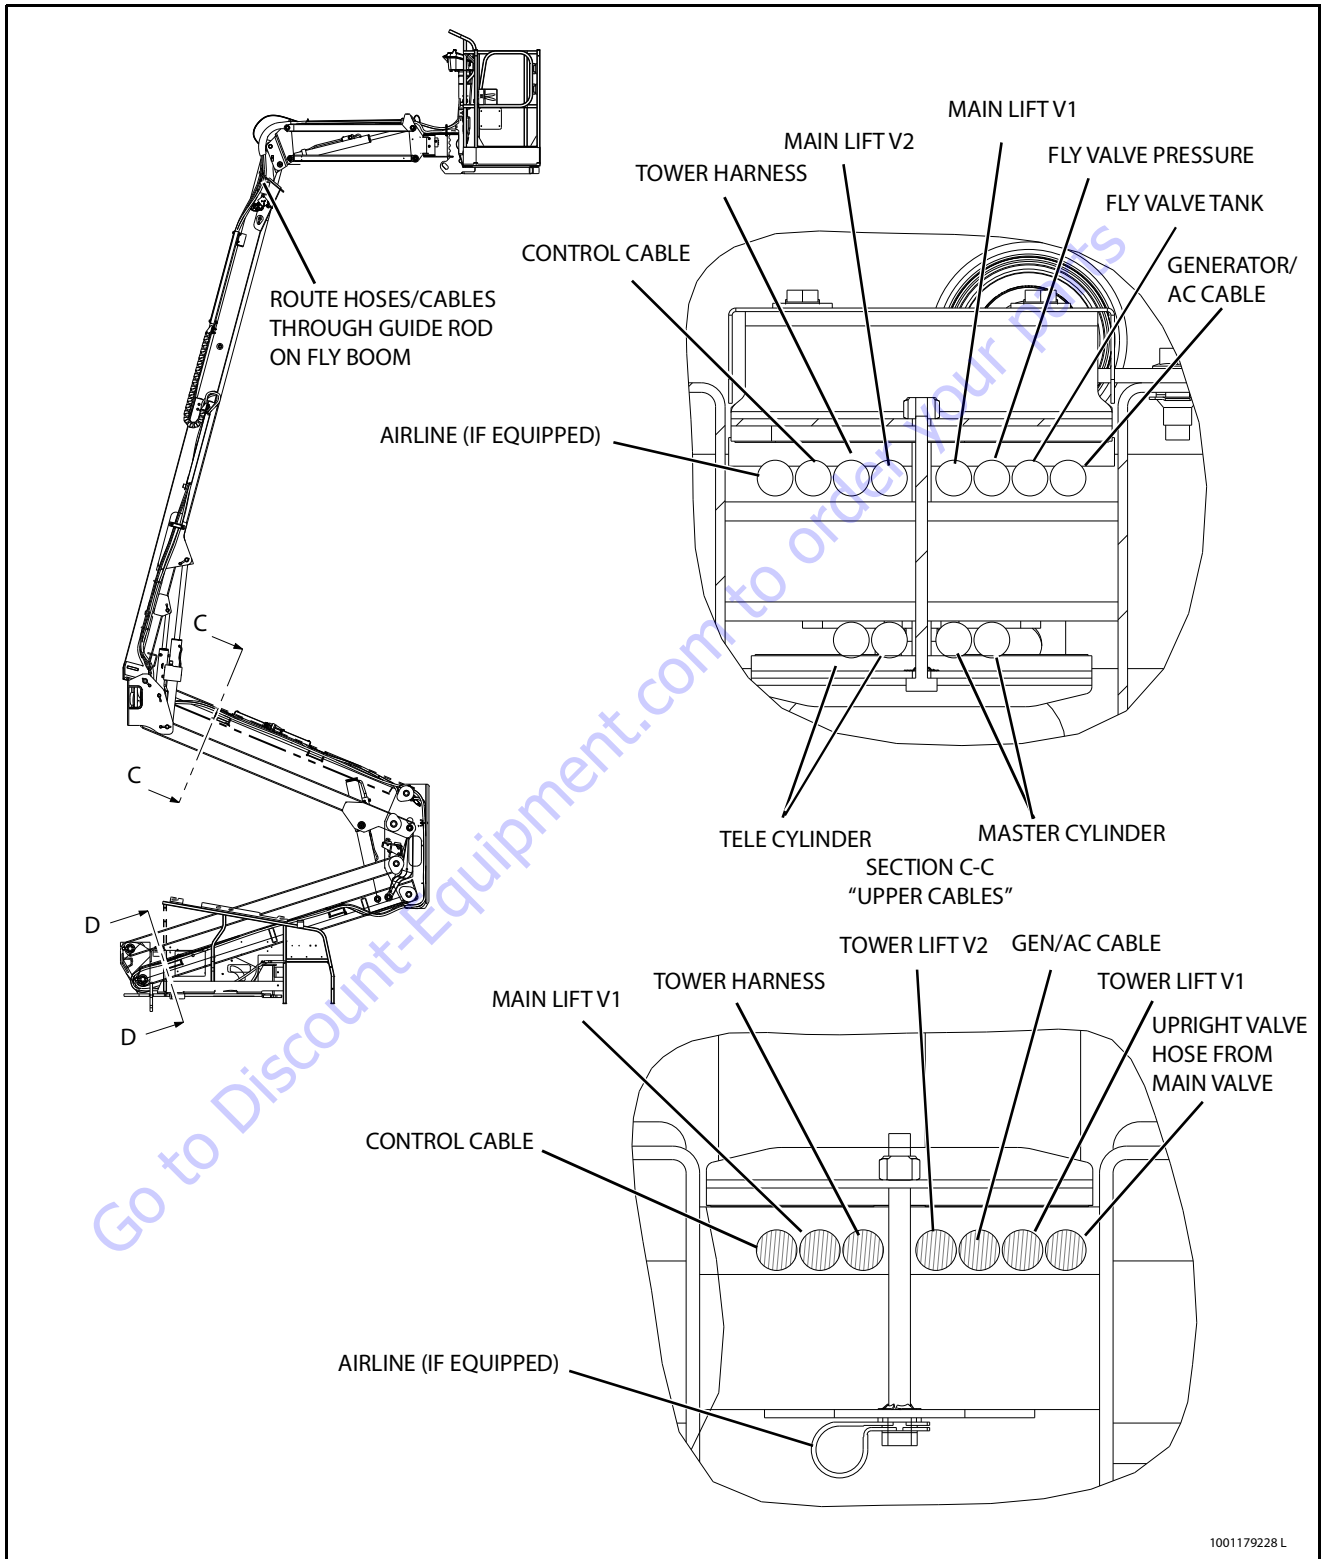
Cables and Clamps Installation - Sheet 1 of 8
